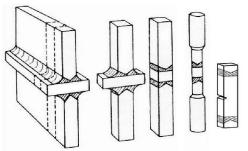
The fabrication method of through-thickness tension specimens [9].
